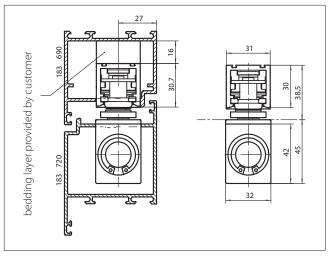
· Dimensions GEZE Boxer size 2-4 (ISM/E-ISM, aluminium door)
